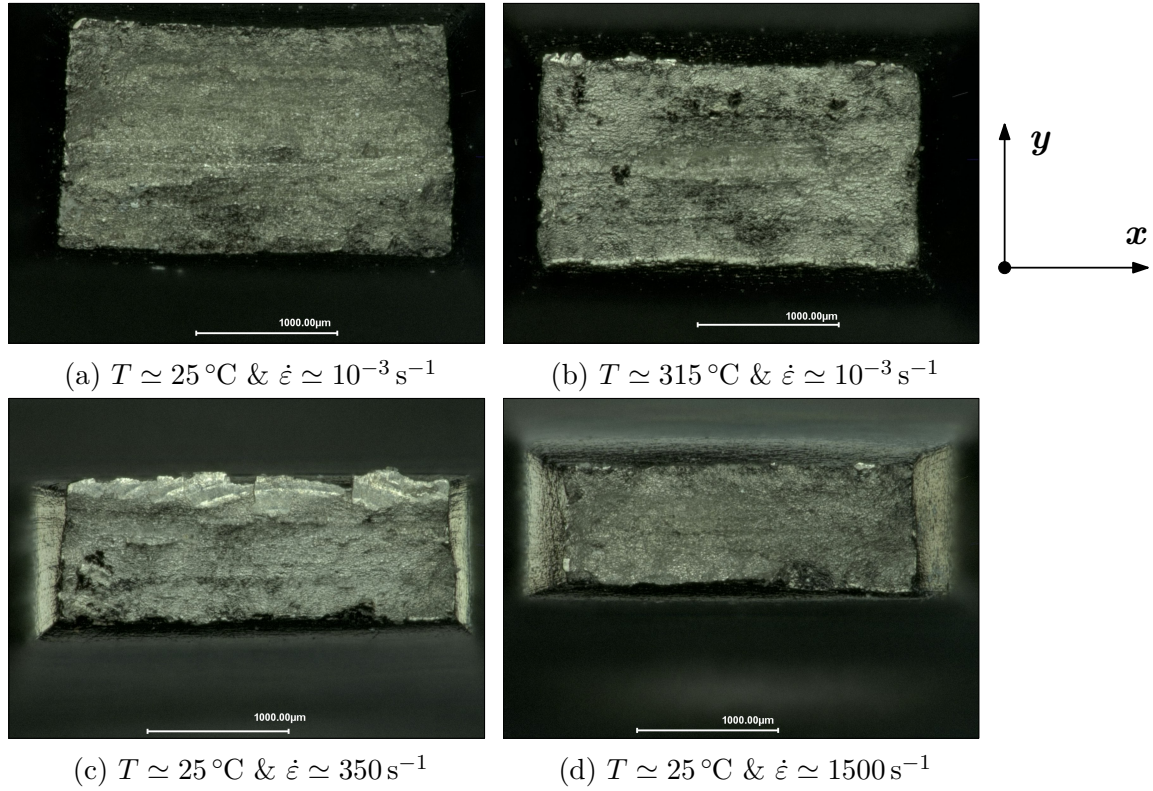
Fracture surfaces of smooth flat tension specimens along the Rolling direction RD. $x \equiv TD$ and $y \equiv ND$.
